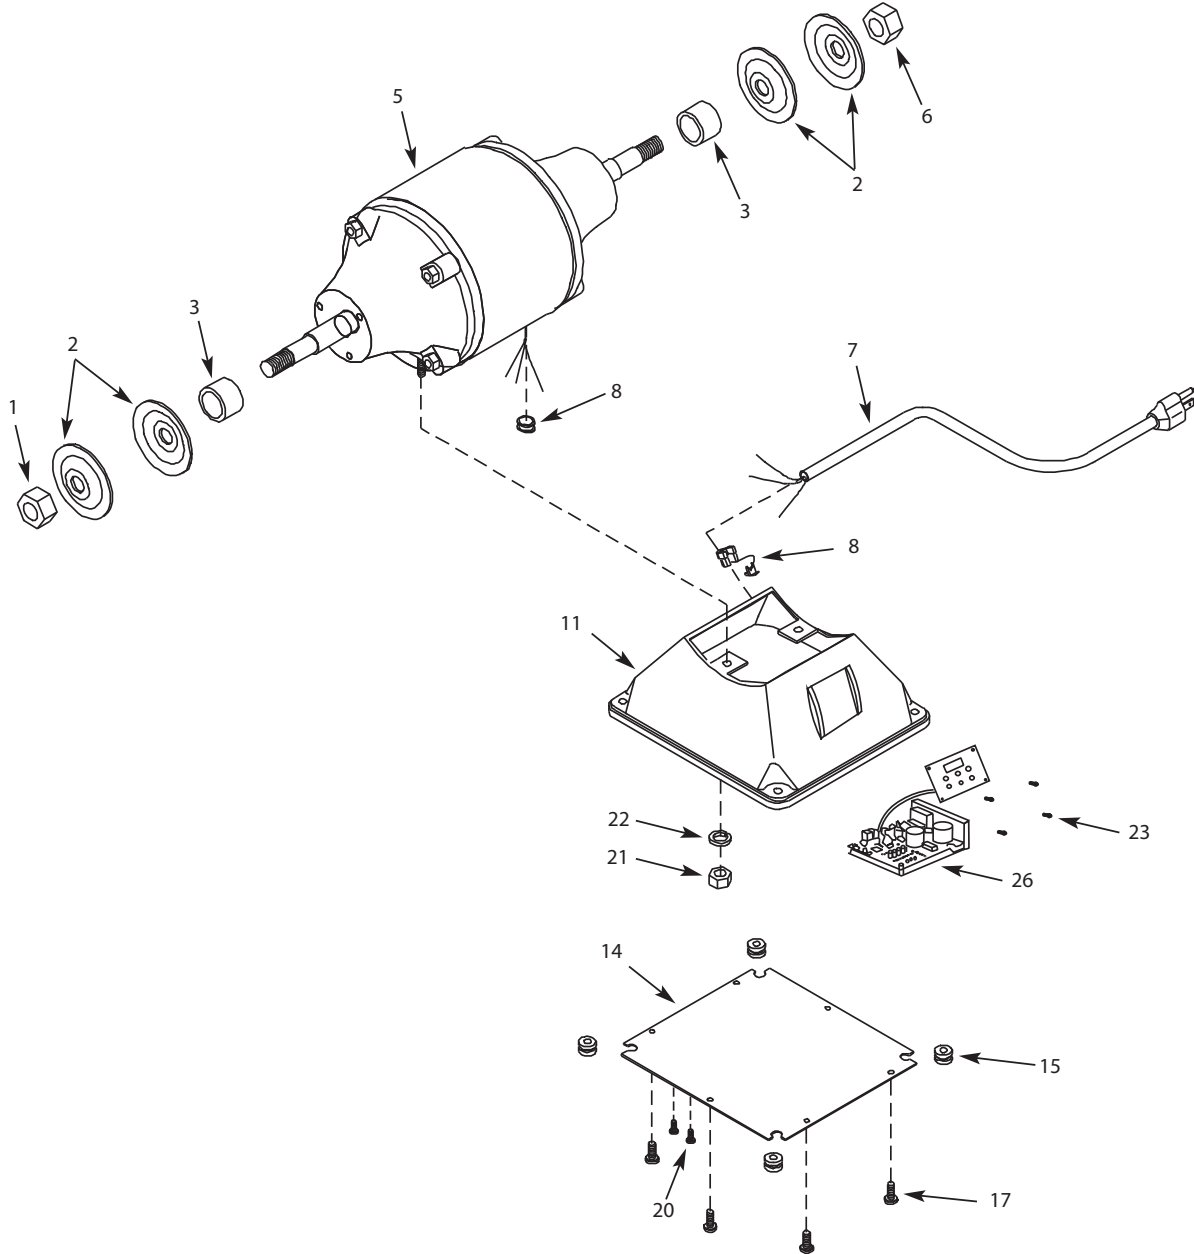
Illustration for 6" Buffer model 9682106 and 8" Buffer model 9682107
